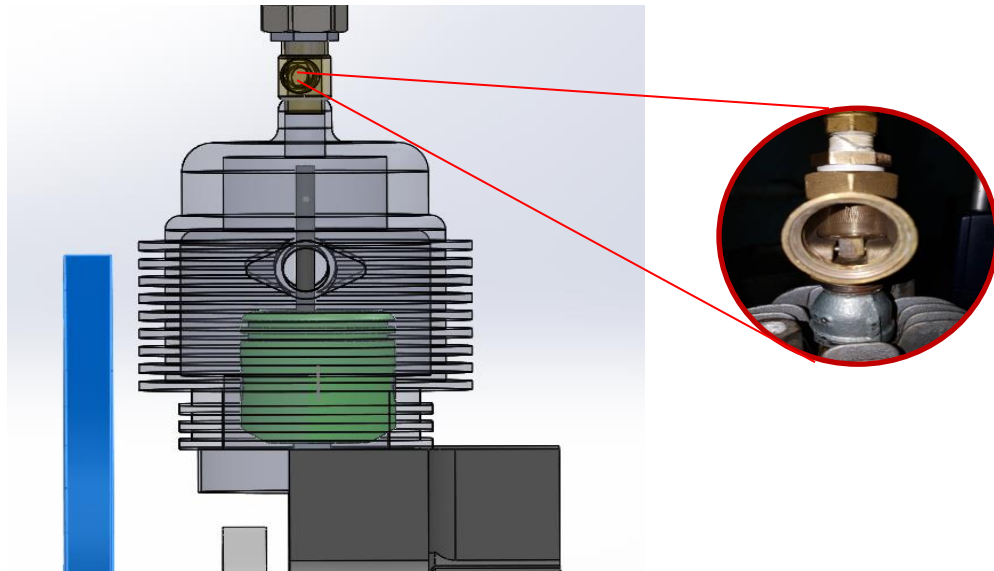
The closing of the check valve disk at bottom dead center (BDC)
